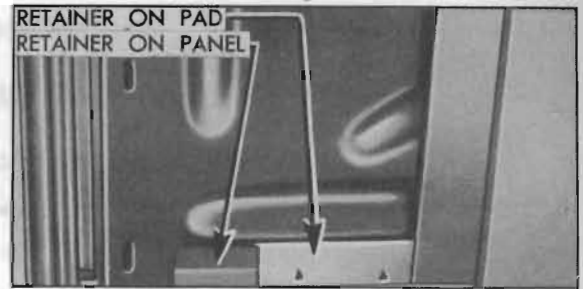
Retainers at Lower Edge of Door Trim Pad
